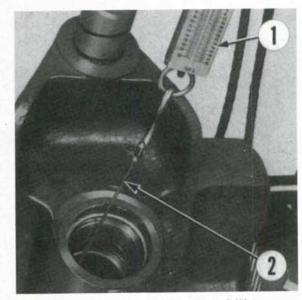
Use a spring scale (1) and cord (2) to measure pull required to rotate differential assembly. Cord is wrapped around differential case and pulled through opening for pinion shaft. Refer to text.
